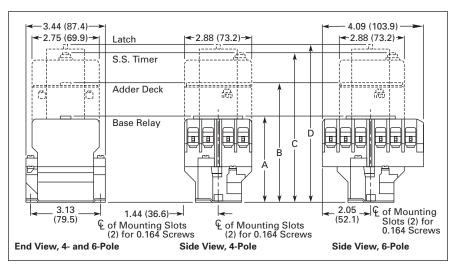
4- and 6-Pole with 4-Pole Adder, Solid-State Timer and Mechanical Latch — Approximate Dimensions in Inches (mm)
